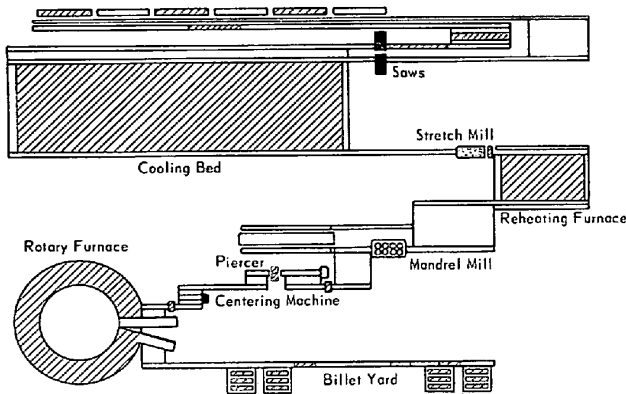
Layout of Mandrel mill at Mannesmannröhren-Werke.
